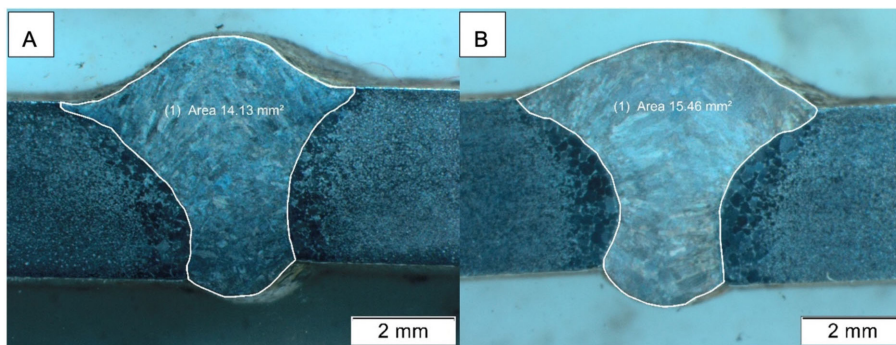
Weld deposition area of samples welded with (A) 0.45 kJ/mm and (B) 0.54 kJ/mm heat input
